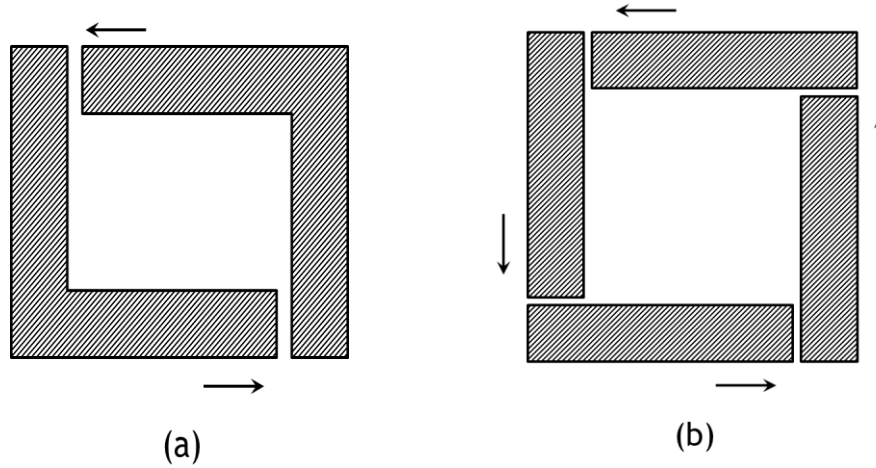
Transformer core assemblies with butt and lap joints assembled with (a) L-shape laminations (b) I shape laminations. Arrows are next to butts of each joint.
